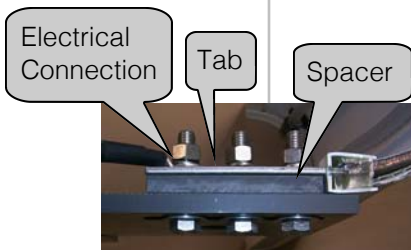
Showing Bracket (PN 100111) i& Spacer (PN 101110) bolted to a Tab.
